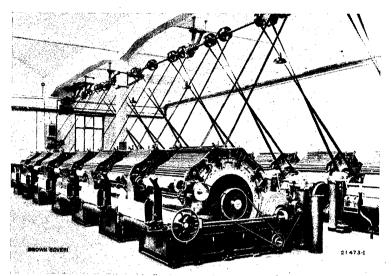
Carding room with group drive of cards by a line shaft directly coupled to a geared motor.
